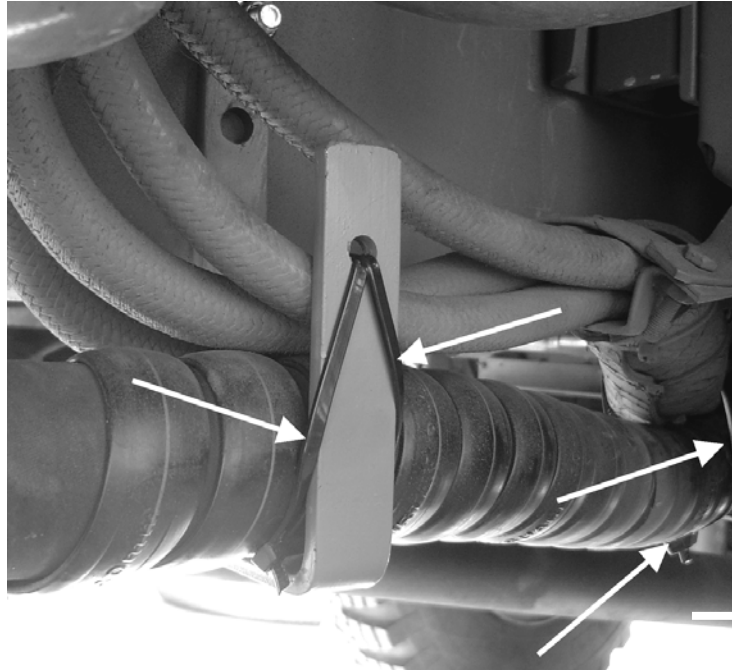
Securing Fuel Lines and Hydraulic Hoses
